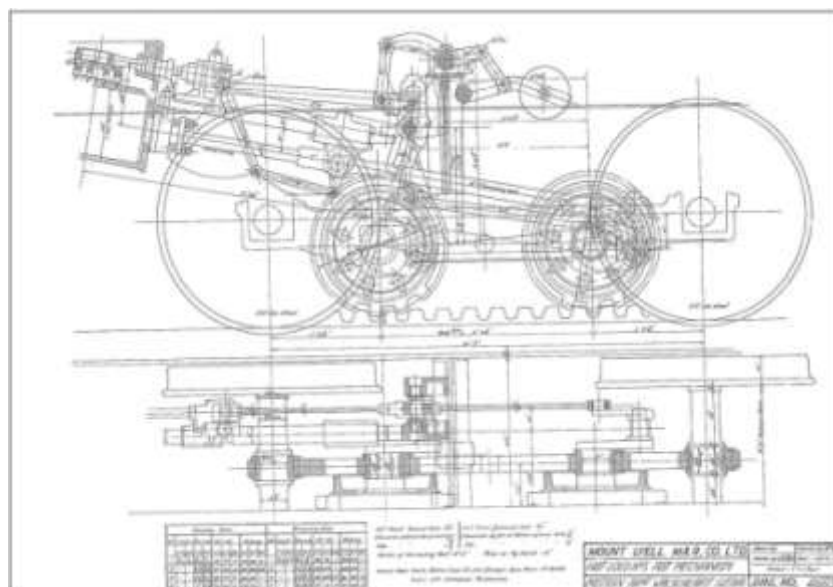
Schematic diagram showing Abt mechanical motion arrangement and Walschaert valve gearing (AOT)
